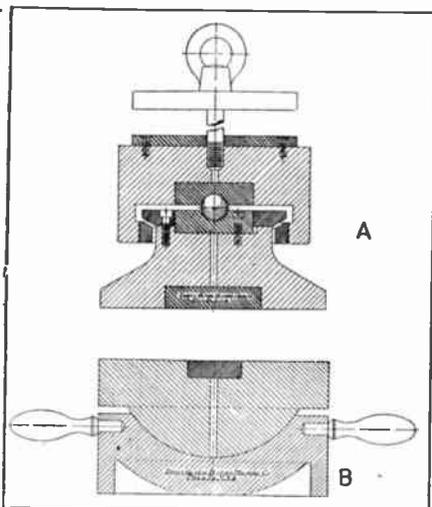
Fittings used in making compression tests on Olsen Universal machine
